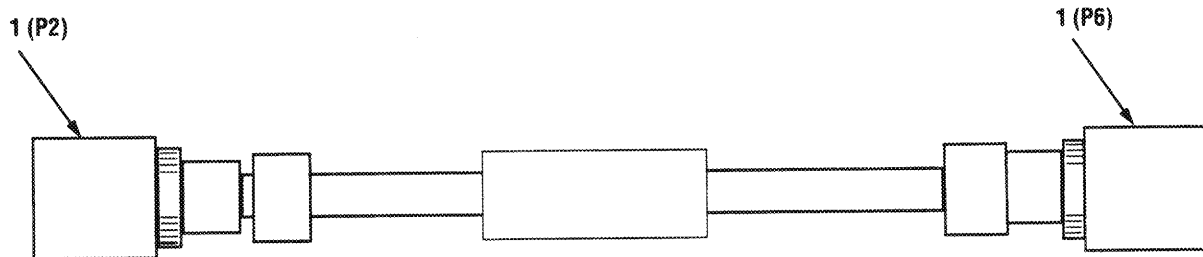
Cable Assembly W62 (3-94305.0000//B)
